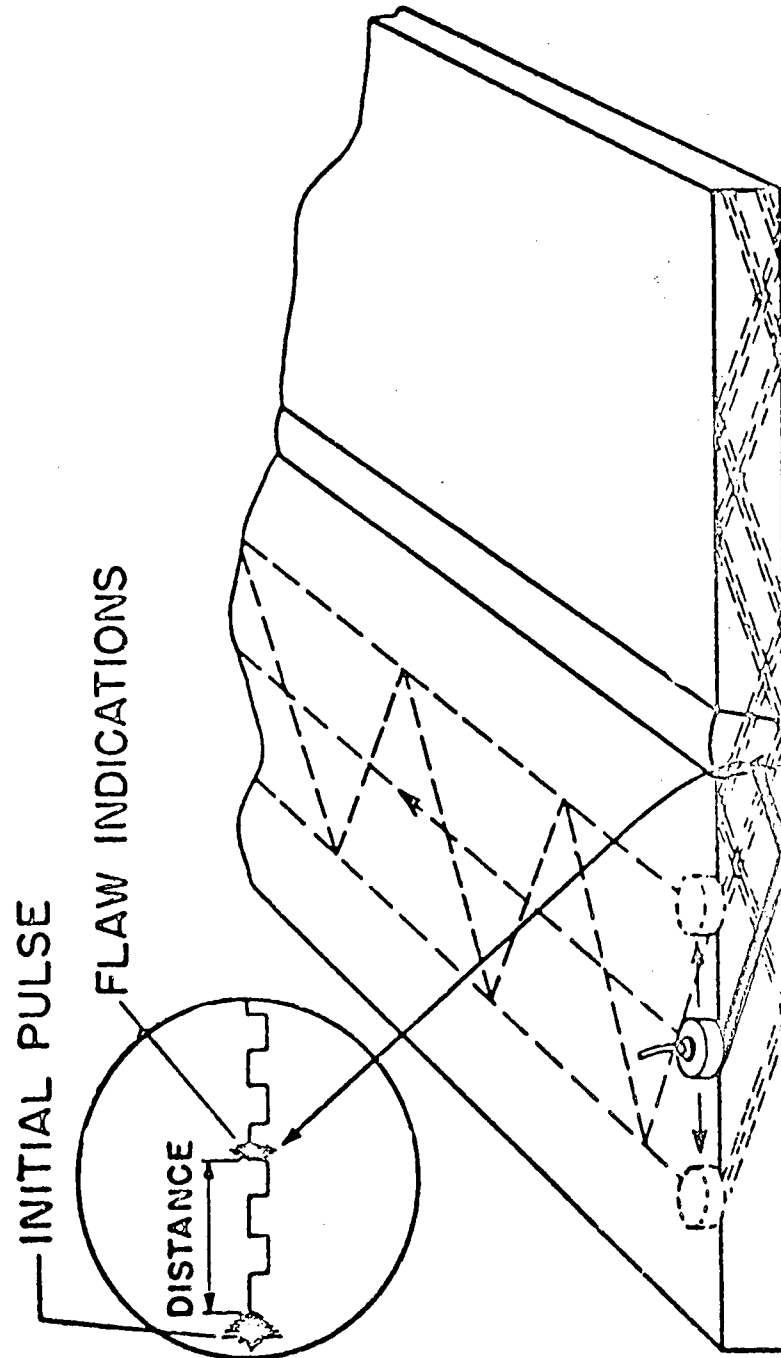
Ultrasonic Testing of a Weld with the Ultrasonic Angle Beam or Shear Wave Technique
